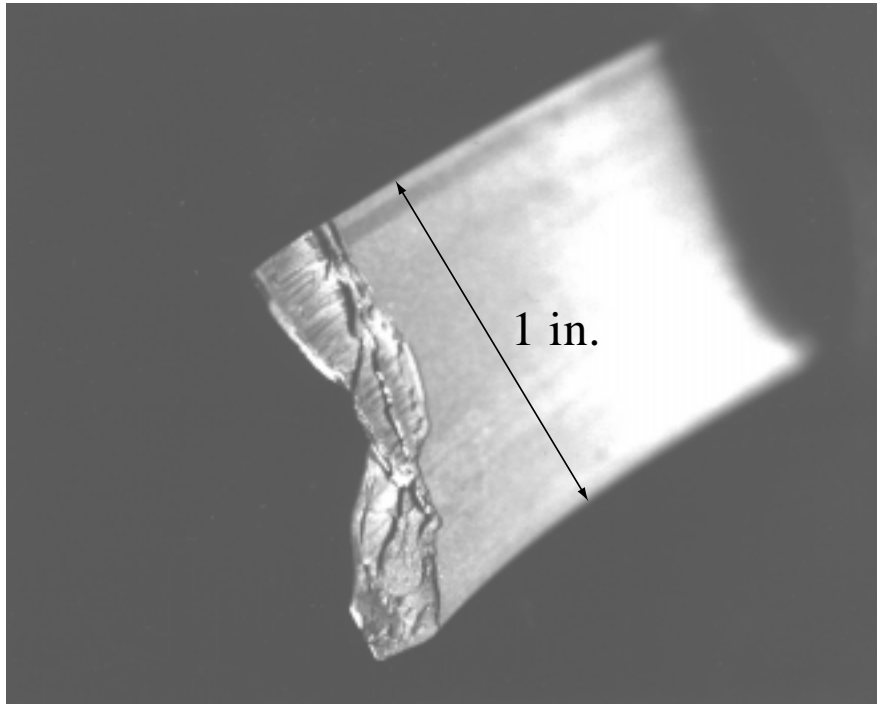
Fracture surface of the broken strip machined from the X2096-T8A3 extrusion. Note severe delamination.
